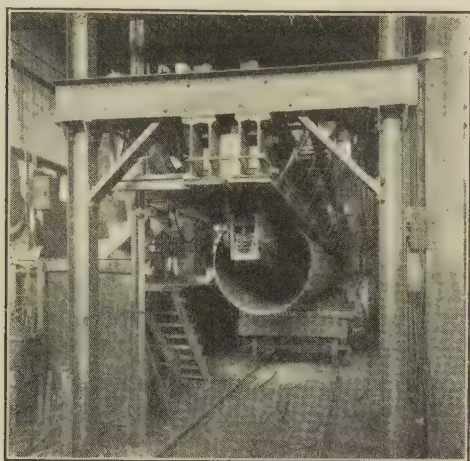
END VIEW OF 36-FT. PIPE WELDING MACHINE SHOWING 30-FT. SECTION OF 48-IN. PIPE READY FOR AUTOMATIC ARC WELDING OF LONGITUDINAL SEAM
